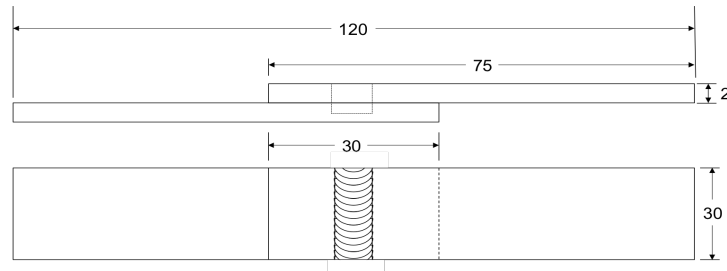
Configuration of the friction stir linear welded lap-shear coupon. Dimensions are in millimeters.
